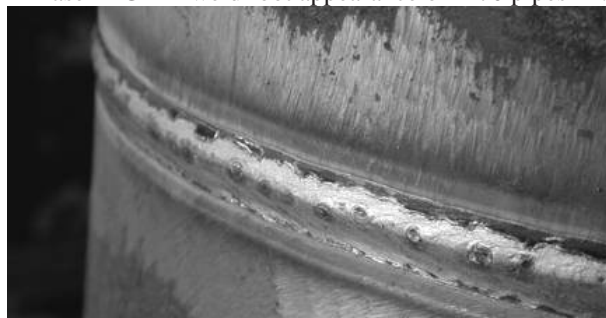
Weld cap appearance on X70 pipes 14.2 mm thick
